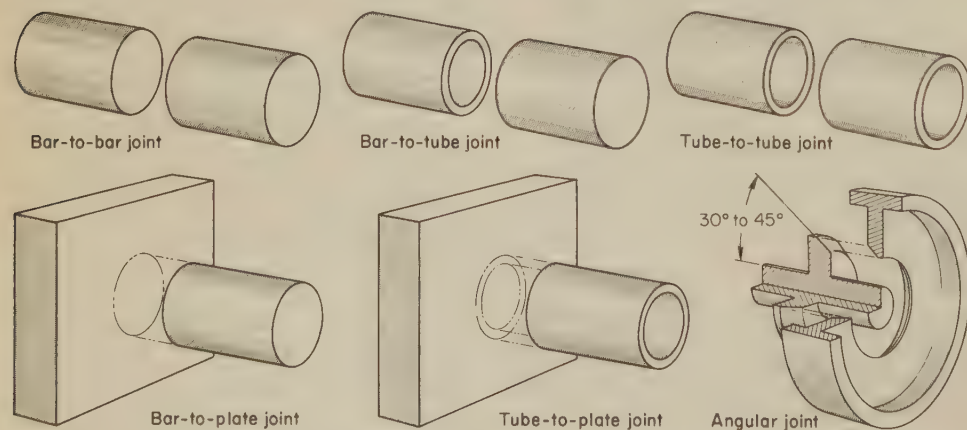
Types of joints commonly made by friction welding. Bars and tubes, and joint surfaces of angular joints, must be concentric with the axis of rotation; bar, tube and plate surfaces to be welded must be perpendicular to the axis of rotation.
